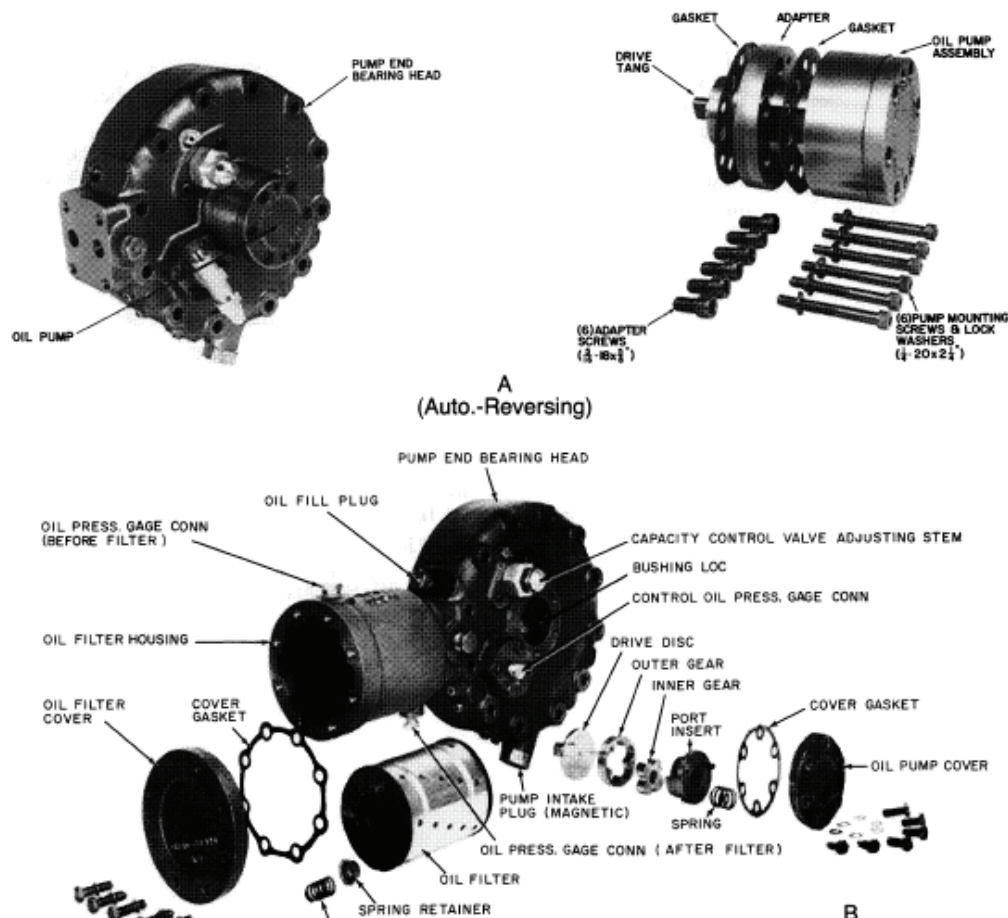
Oil Pump and Filter Assembly (5H120, 126)
